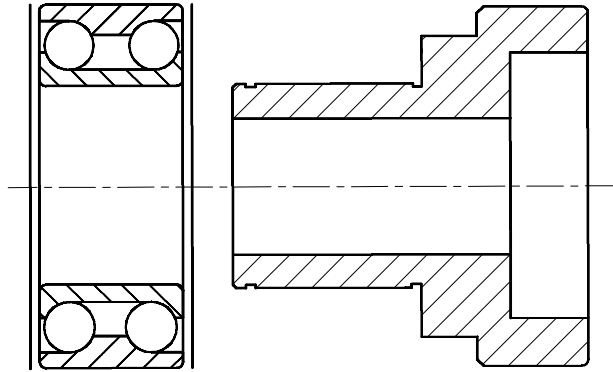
After loading the SHAFT drawing, BEARING is automatically updated
